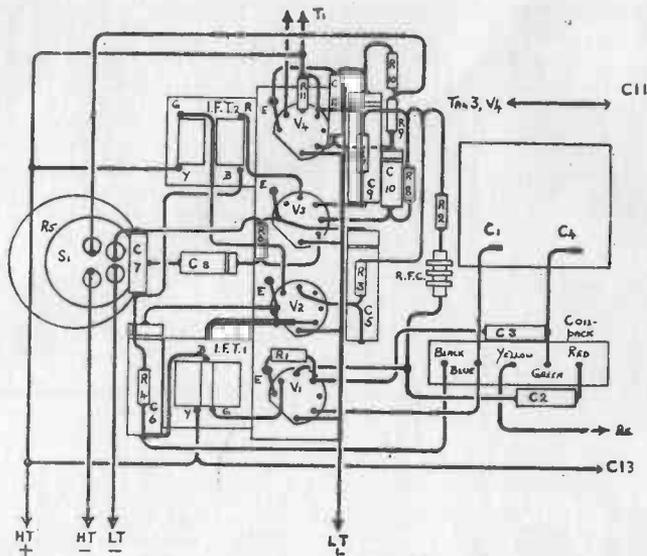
Point-to-Point Wiring Plan of the "Carri-Major"
